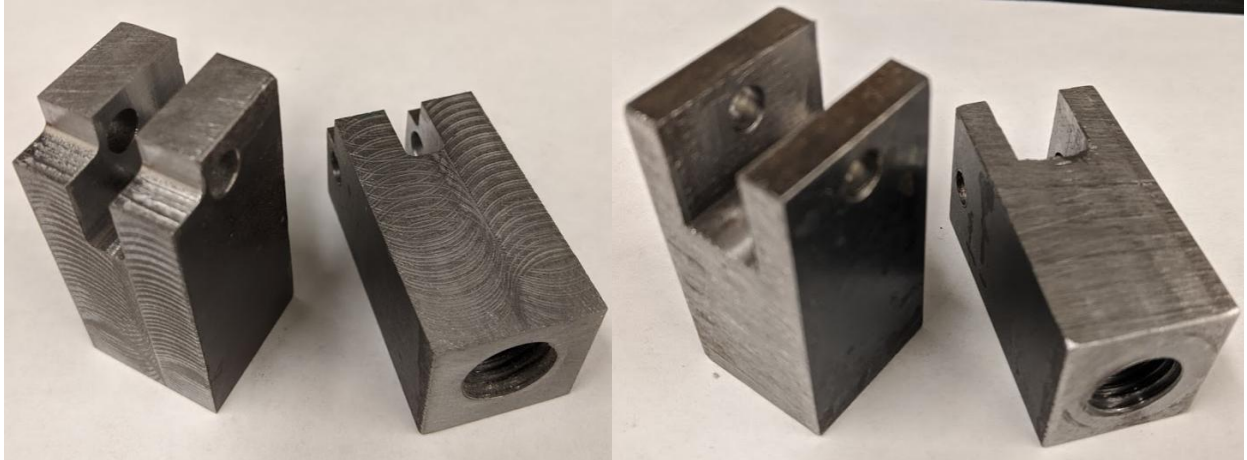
Test fixtures for the 6 mm specimens (left) and the 12 mm specimens (right)
